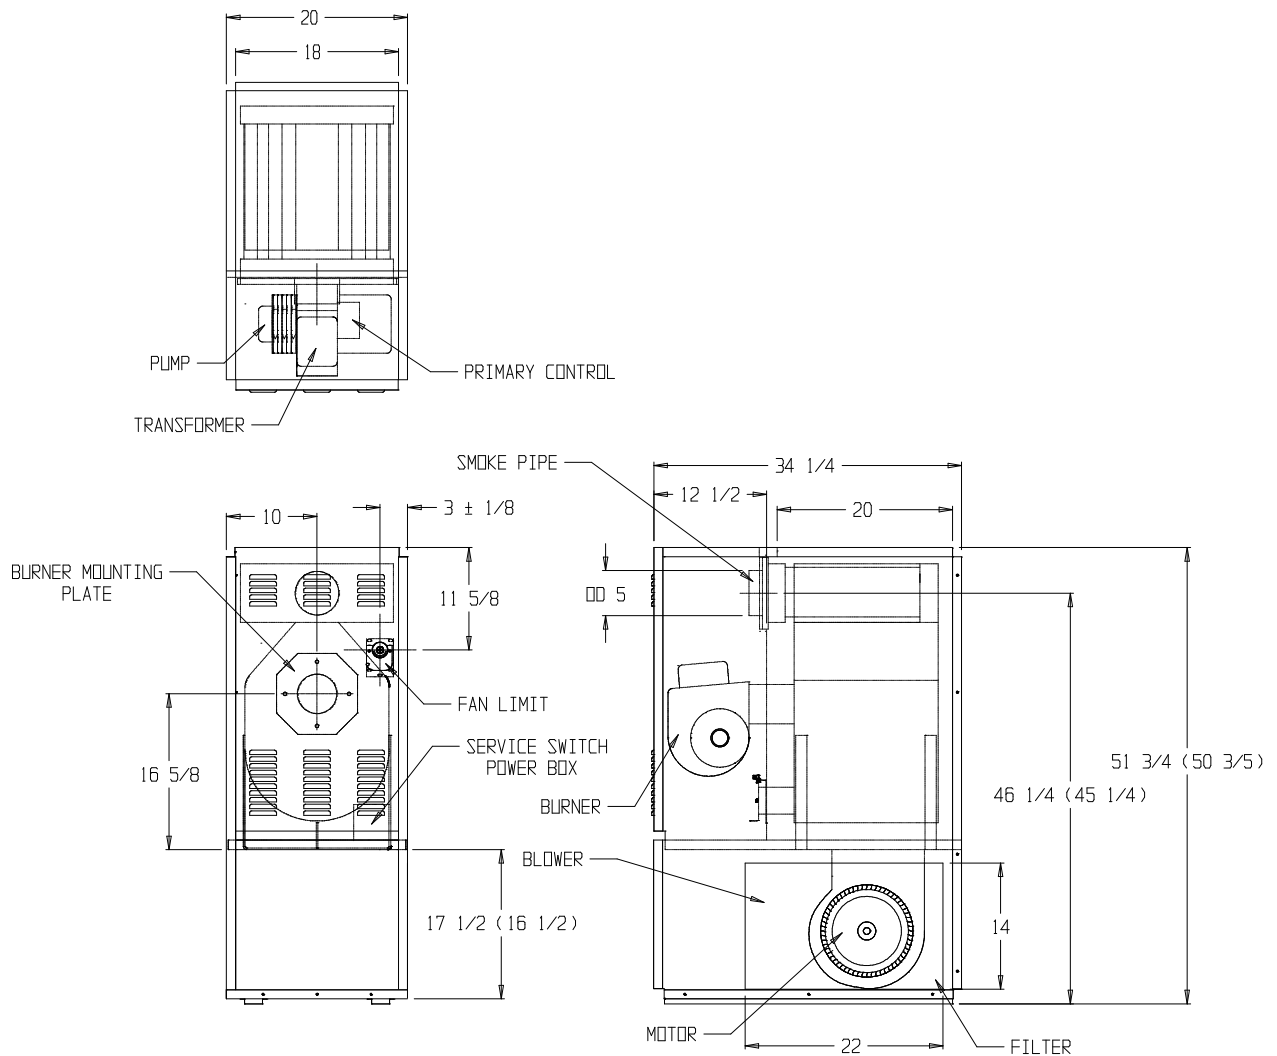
DIMENSIONS & CONTROL LOCATION – NH3
